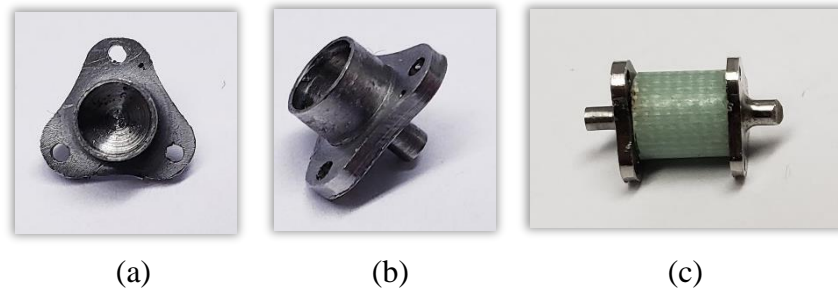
Mandrel plugs shown from top view (a) and side view (b). Assembled G10 mandrel (c).
